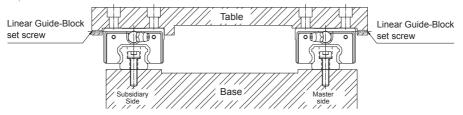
Mounting the Linear Guide without Set Screws on the Master Linear Guide Rail
